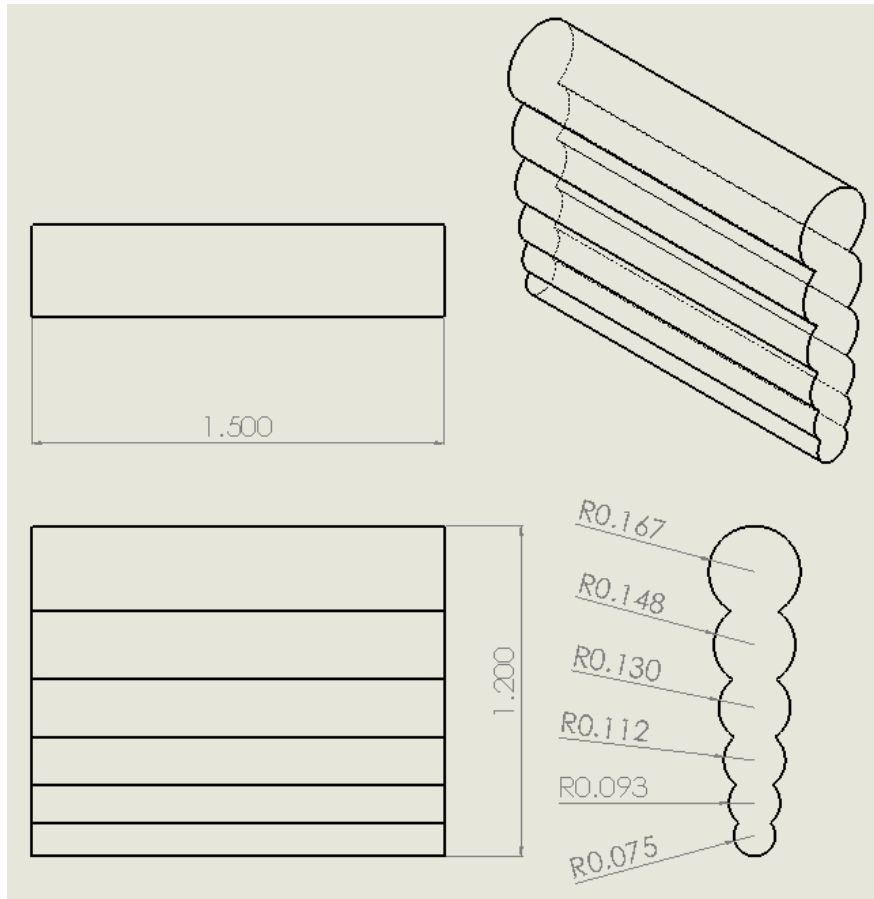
Variable Thickness Cylindrical Flap Drawing.
